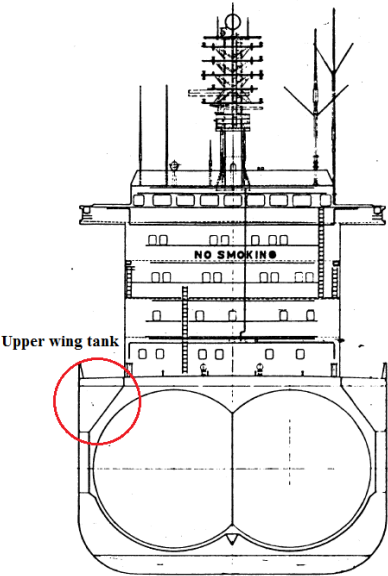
Clipper Skagen upper wing ballast tank - Cross section
